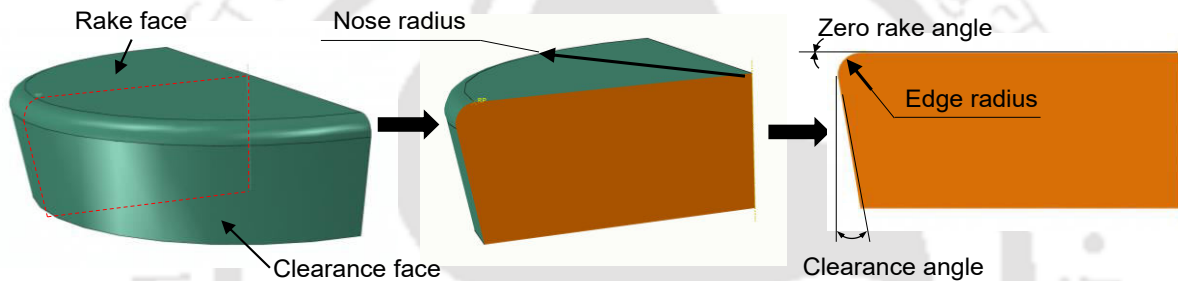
Schematic of the tool geometry of single point diamond tool
